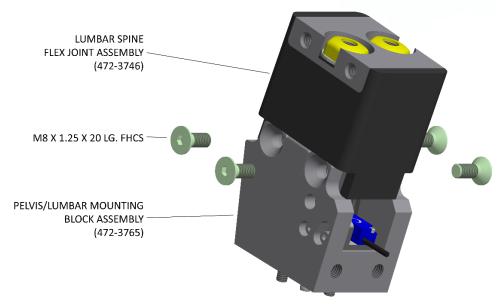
Lumbar Flex Joint Assembled to Pelvis/Lumbar Mounting Block
